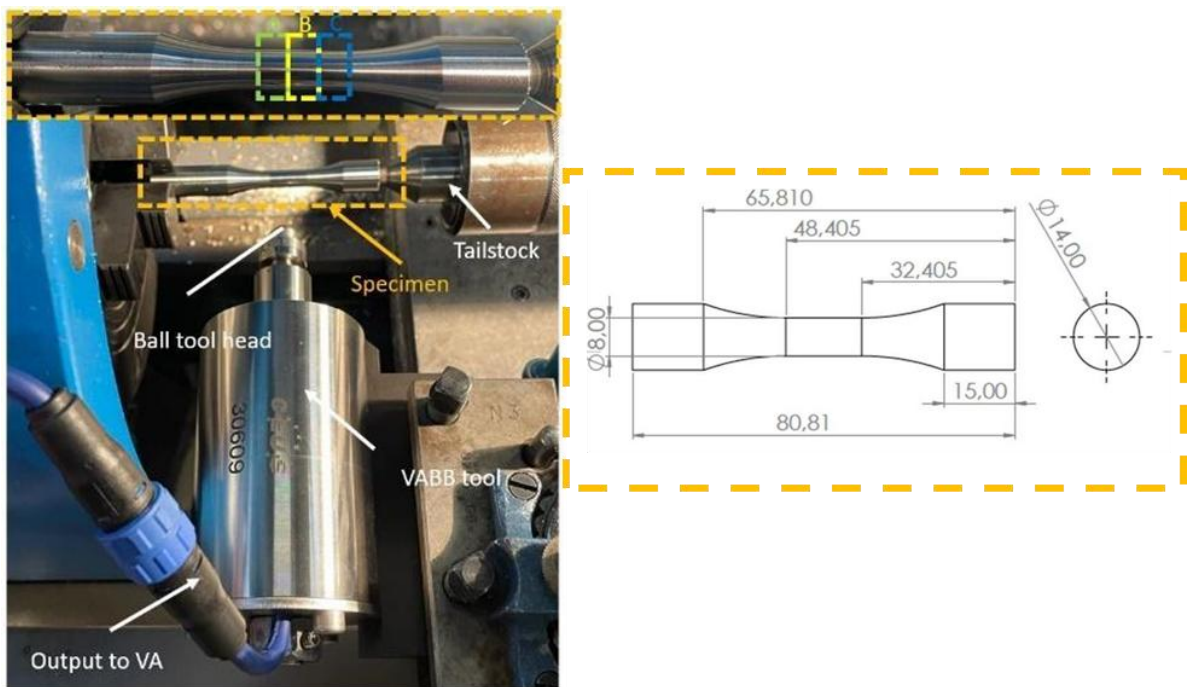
Ball burnishing setup for the specimen's fabrication and dimensions.
